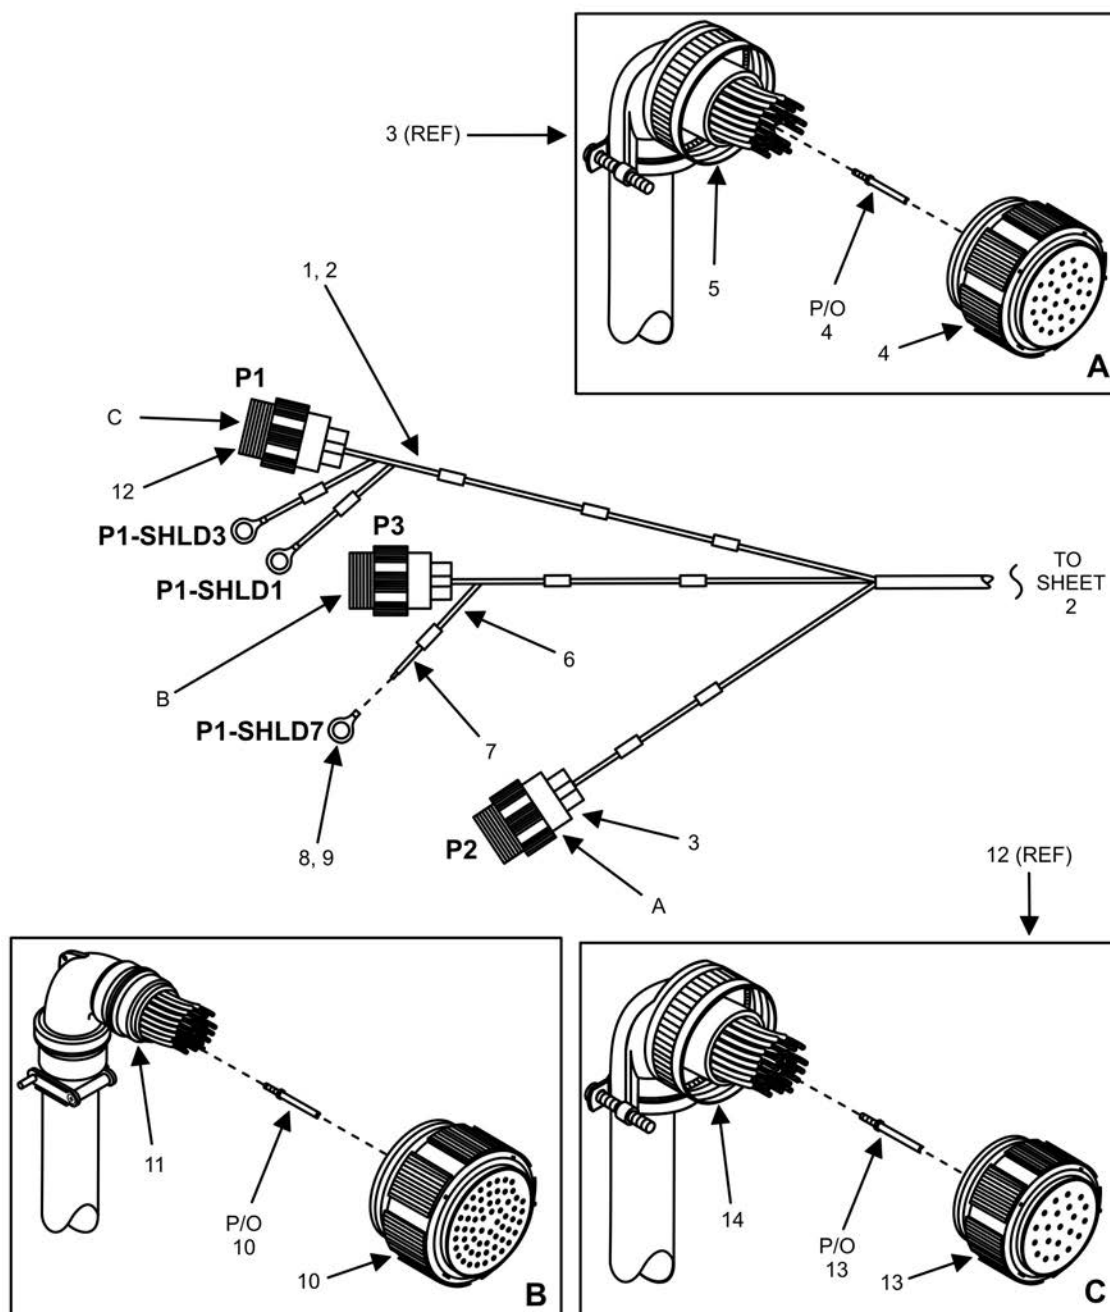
Engine Wiring Harness (Sheet 1 of 19).
